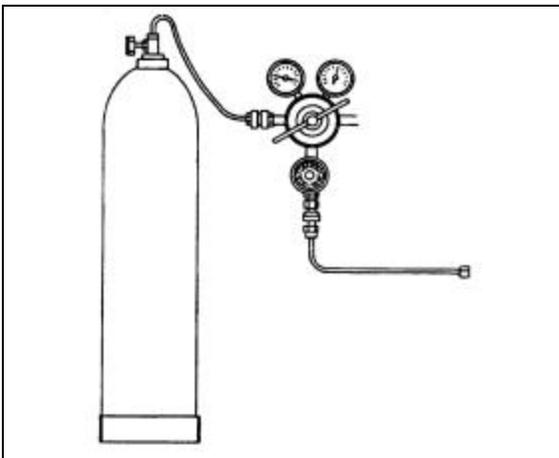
Assemble and Install Pressure Regulator Onto Nitrogen Tank
